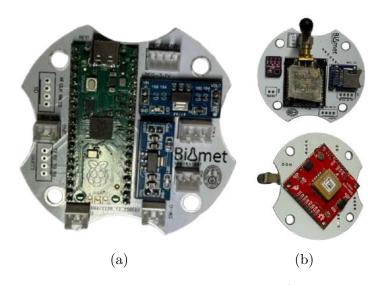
Lower part of the CanSat manufactured: a) PCB1 and b) PCB2.
